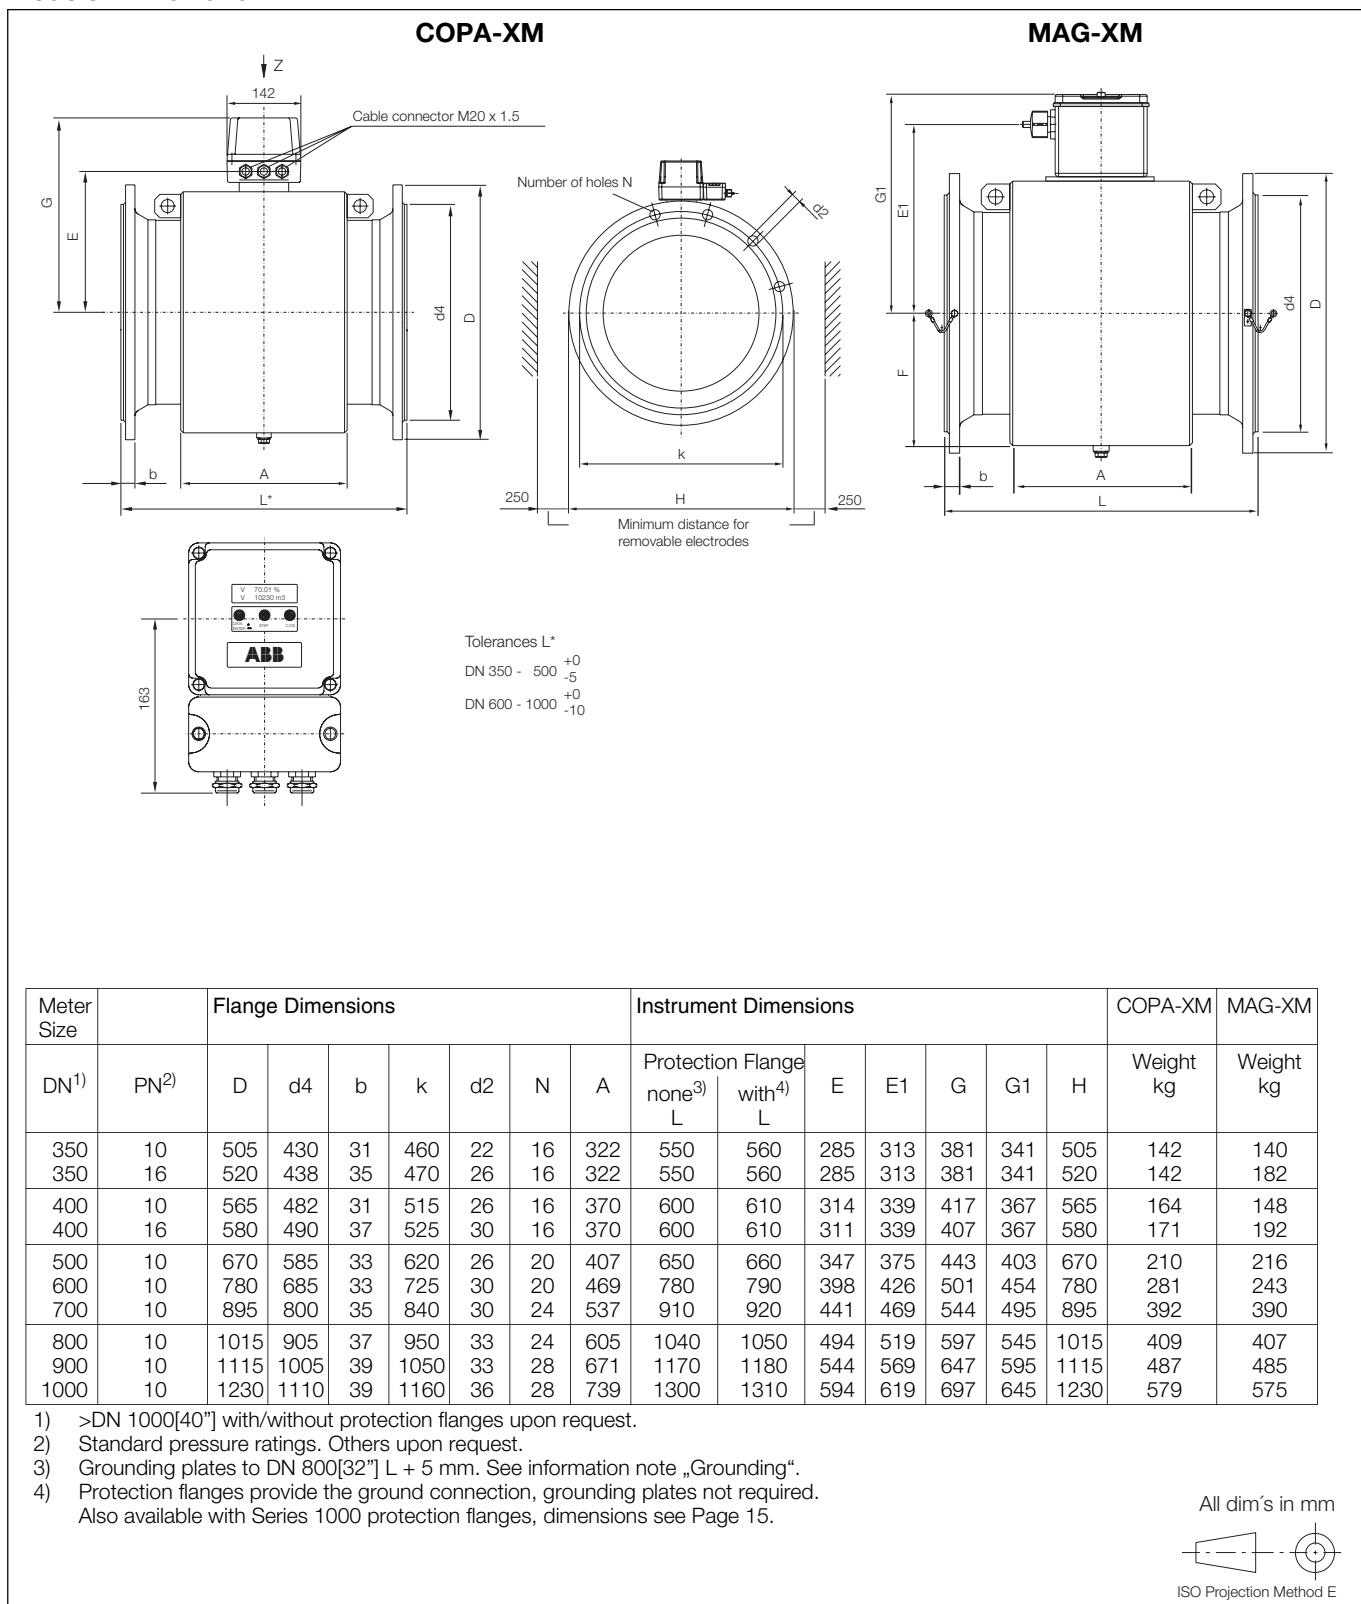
Flowmeter Primaries DN 350 to DN 1000 [14" to 40"], DIN Flanges
